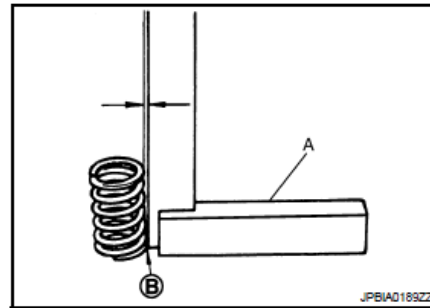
Measuring Maximum Clearance Between Top Of Spring And Try Square
